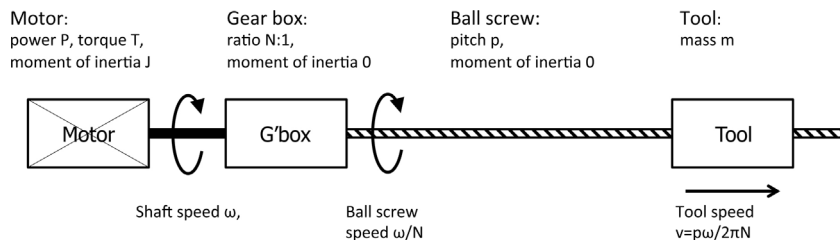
A simplified model of a single axis in a computer controlled machine.
